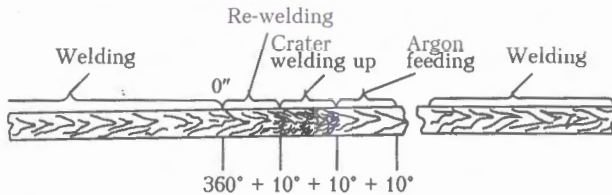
Succession of operations during welding the cap with the cartridge (length of weld $L_w = 298.5$ mm)
